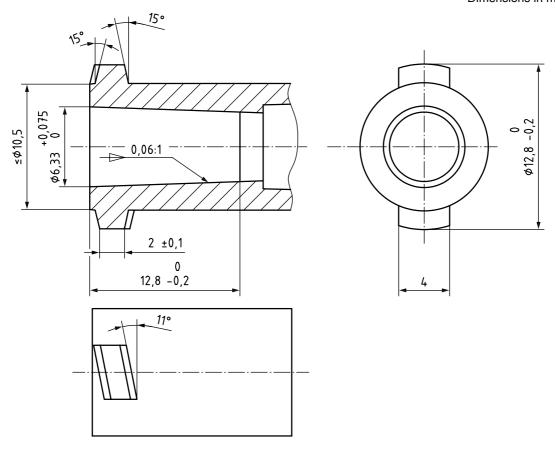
Main fitting dimensions of extracorporeal blood circuit connector to blood ports of haemodialyser, haemodiafilter or haemofilter
